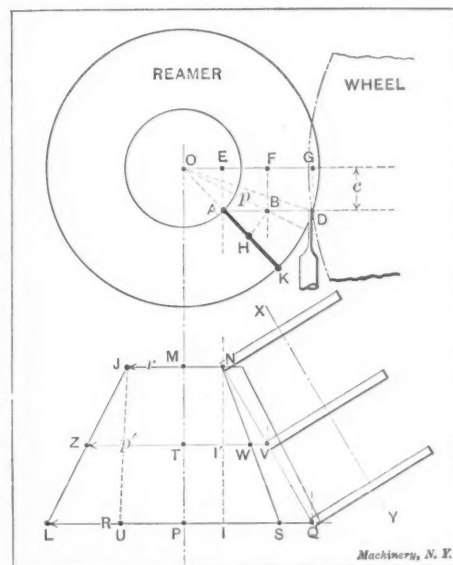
Diagram for Calculating the Error Involved when grinding a Taper Reamer by Method shown in Fig. 1.
